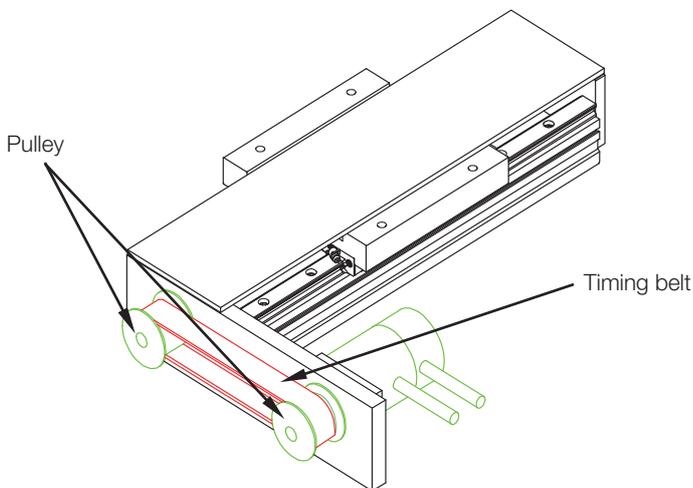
Wrapped motor schematic (with pulley cover removed)
